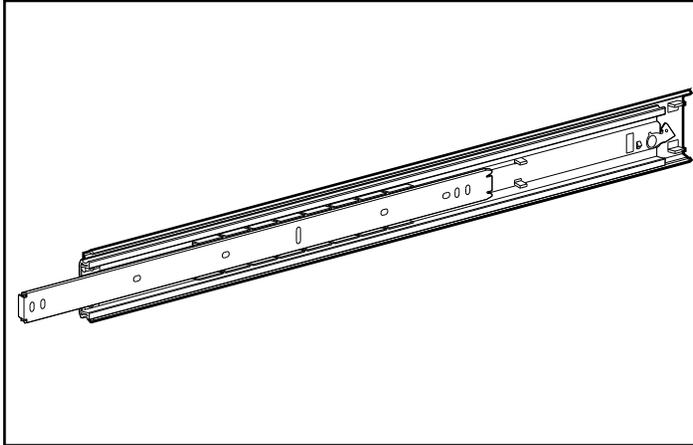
Slide rail assembly (outer bracket rail and inner component rail)
